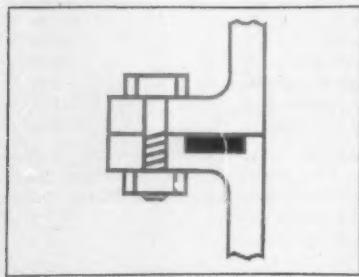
Flange design which confines gasket helps minimize blowout pressure.
